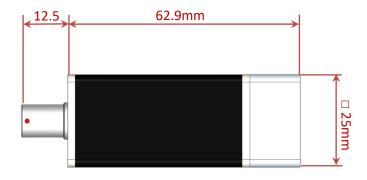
CUBE527R OUTER DIMENSIONS (TOP VIEW)
